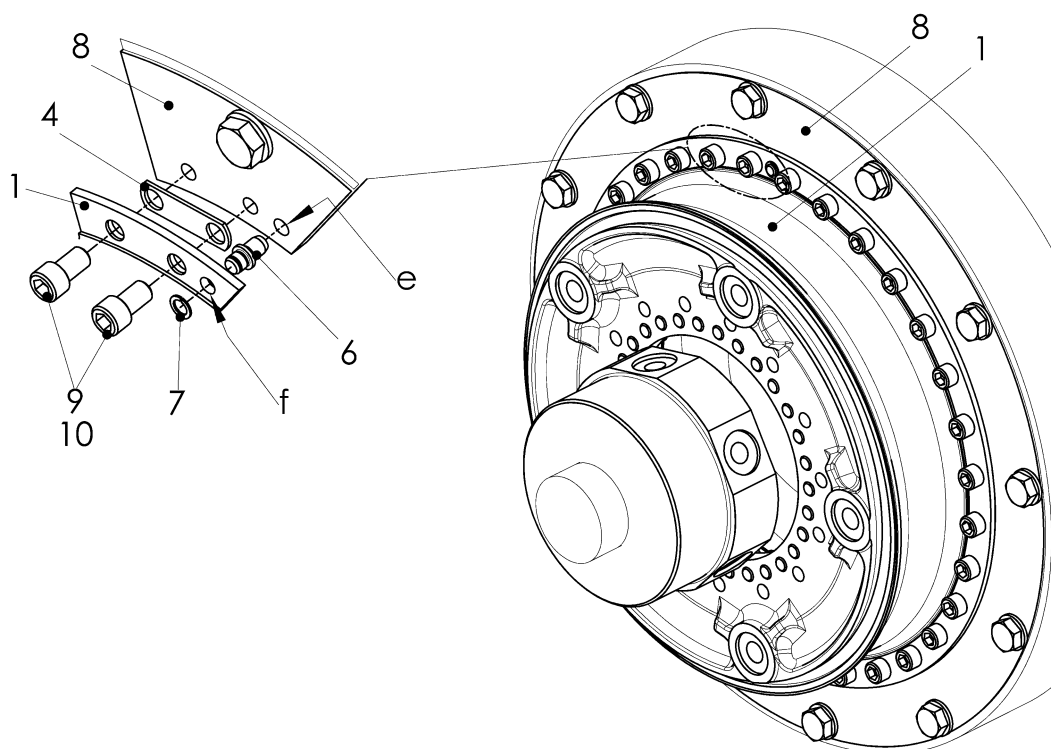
Mounting the link flange assembly to the adapter (8)
